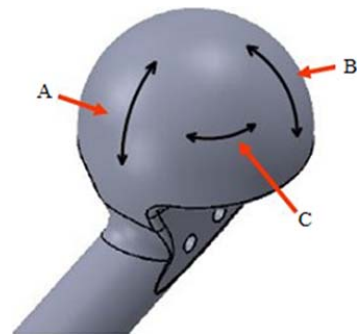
Three directions of surface roughness and dimensional accuracy measurement
